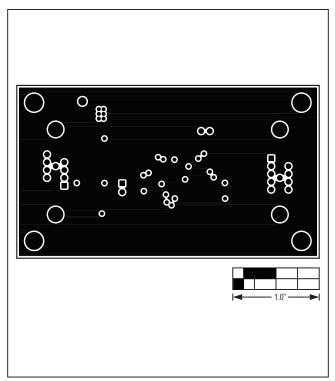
MAX14895E EV Kit PCB Layout—Inner Layer 2
